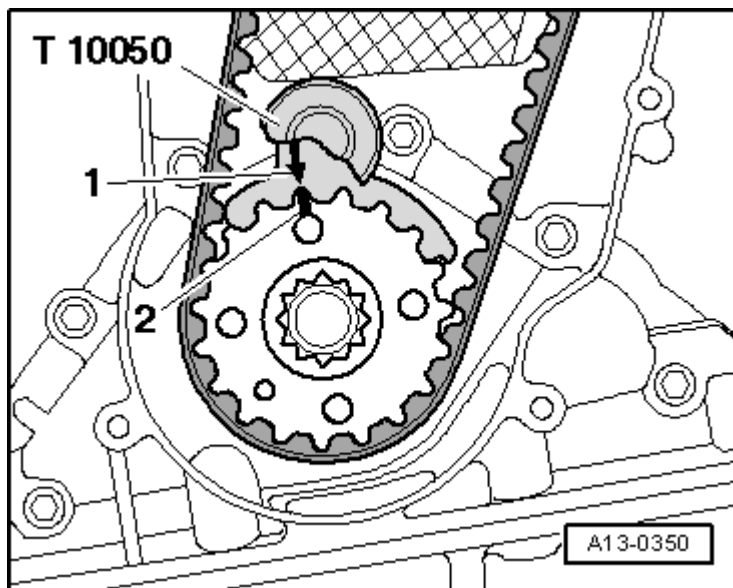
Identifying Crankshaft Toothed Belt Pulley And Crankshaft Stop T10050
